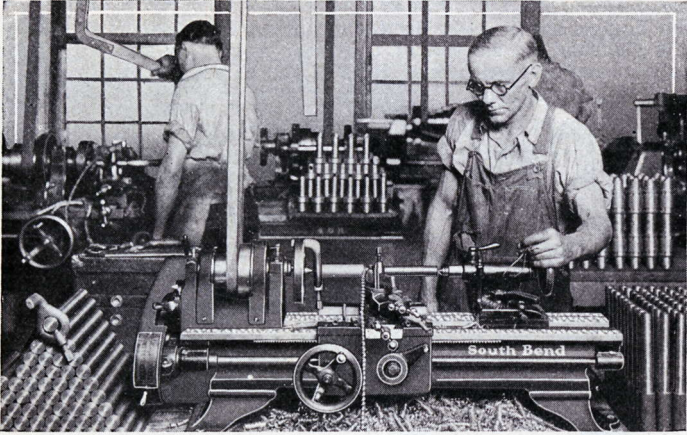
A 9-inch Bench Lathe on a Manufacturing Job
